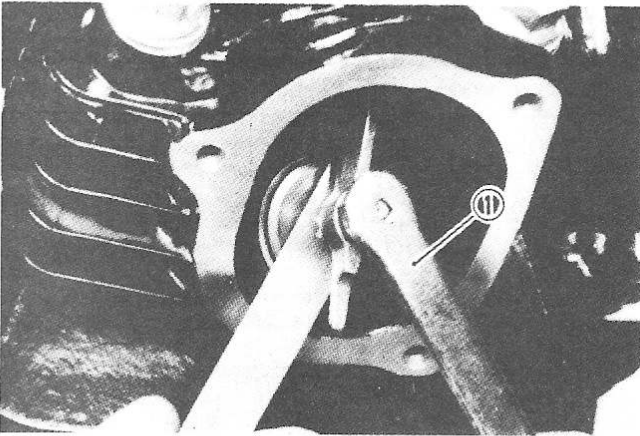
The special wrench (1) is used to turn the adjusting screw when the valve clearance is adjusted (Sec 34)
